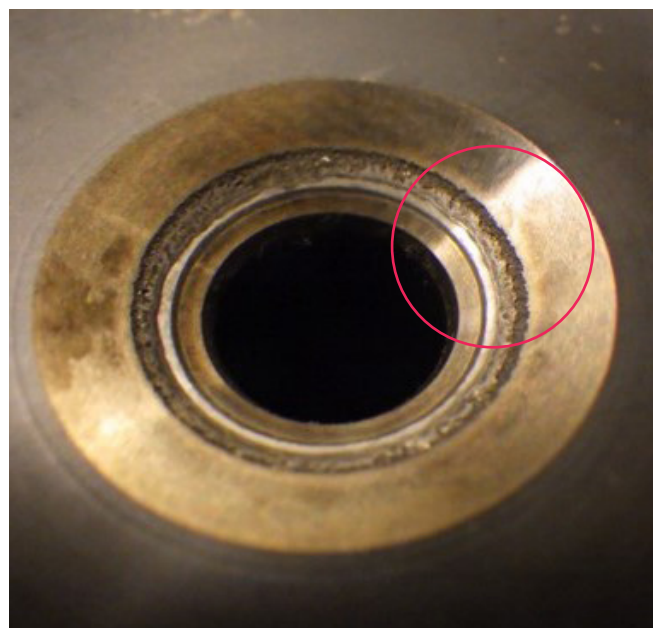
Close-up of cavitation damage found at lower end of non-return valve – towards thrust spindle pipe
